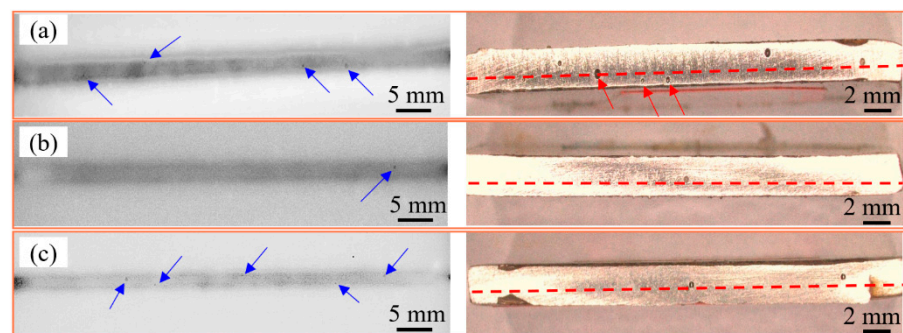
Distribution of porosities at different welding positions: (a) vertical up welding, (b) vertical down welding and (c) horizontal position welding.
